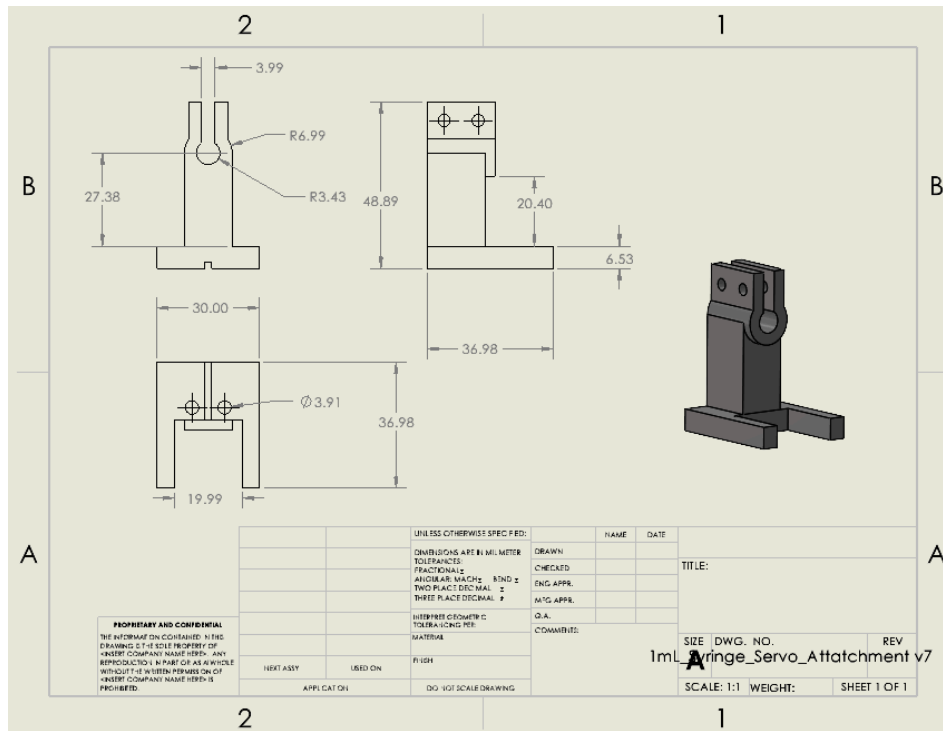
1mL Syringe Servo Attachment CAD Drawing
